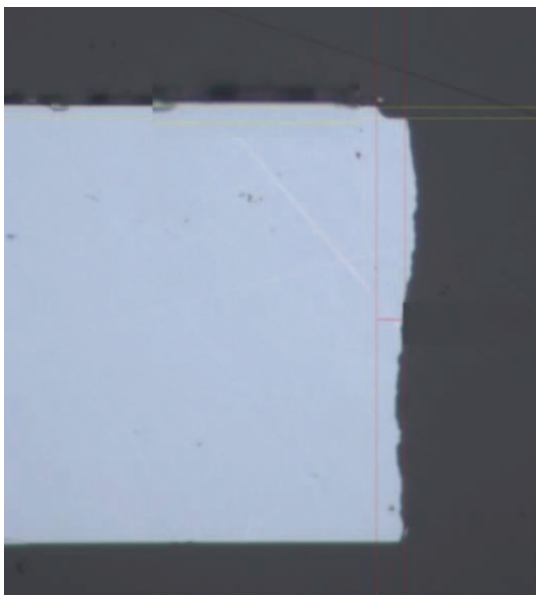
Side wall undercut of 4.5um when using an RF plasma source to etch die side wall
